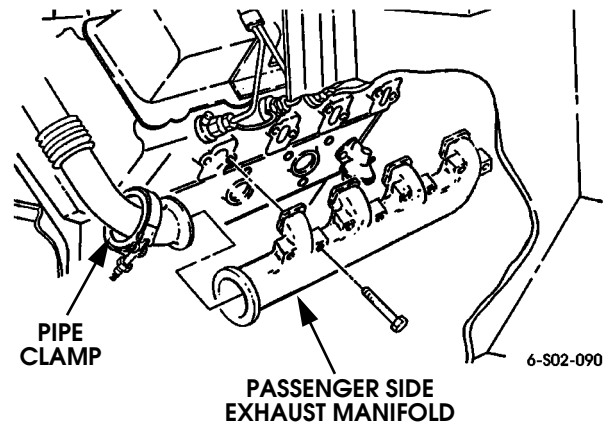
Right Side Exhaust Manifold Removal (Turbo Diesel)
